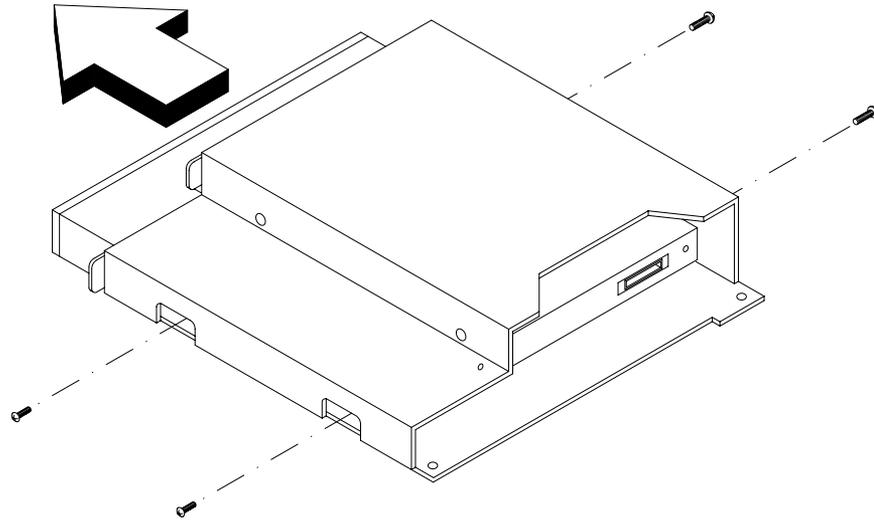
Removing the CD-ROM Drive from the Drive Module
